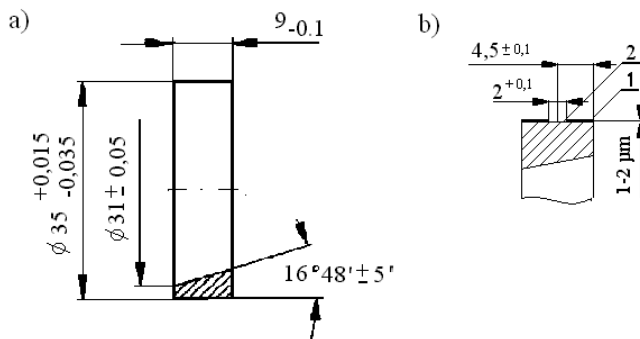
Ring-shaped sample: a) Sample's dimension, b) Sample with ring structure (1 – TiN coating, sample material 46Cr2)
